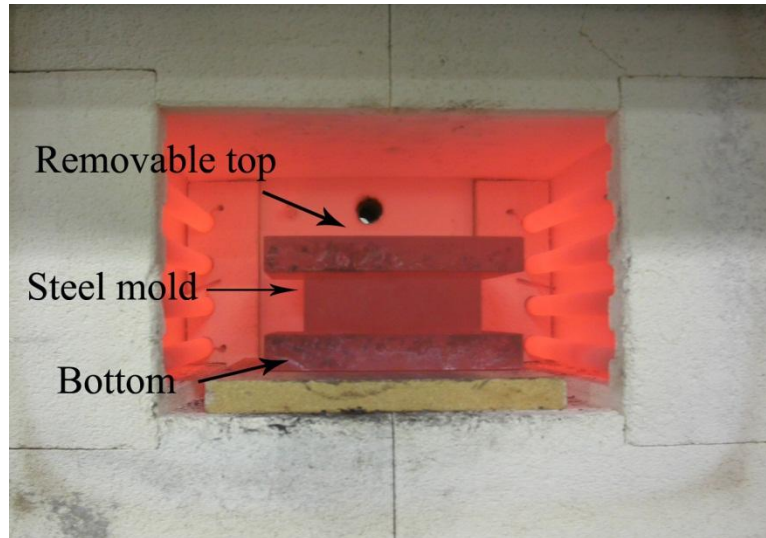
Foaming in the furnace with a steel mold closed at the top and bottom.
